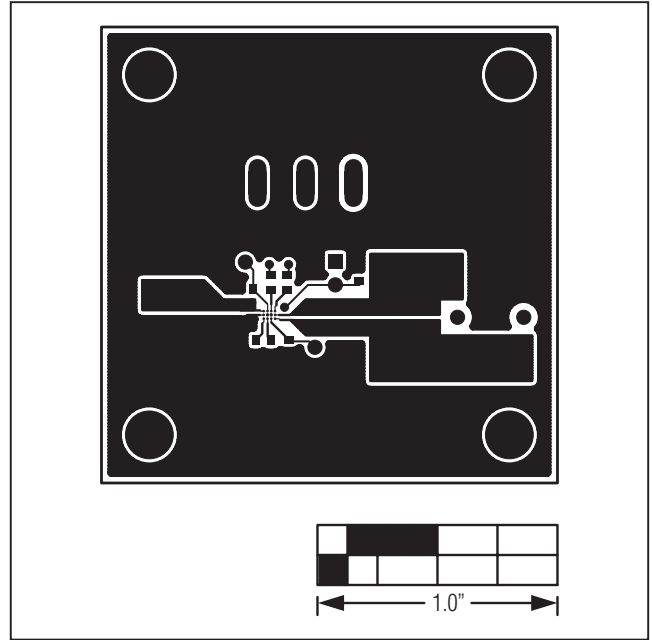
MAX97200A EV Kit PCB Layout—Component Side
